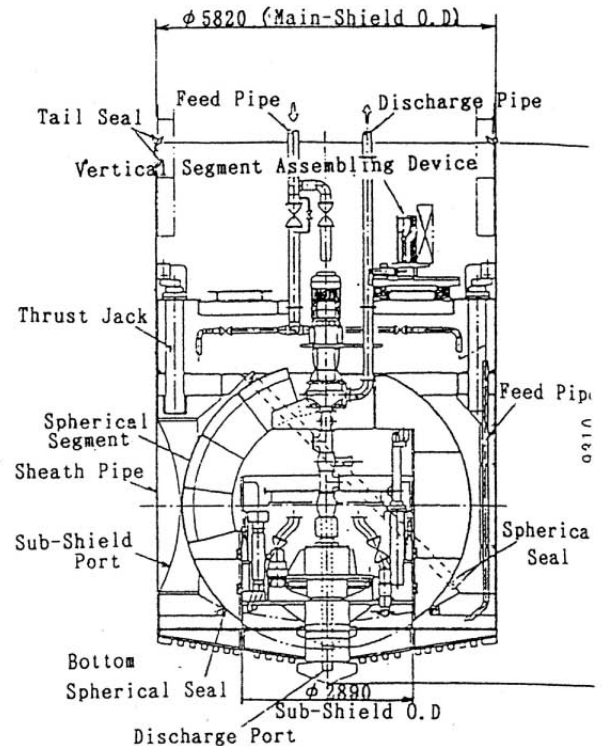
Overall assembly drawing of vertical-horizontal shield machine
